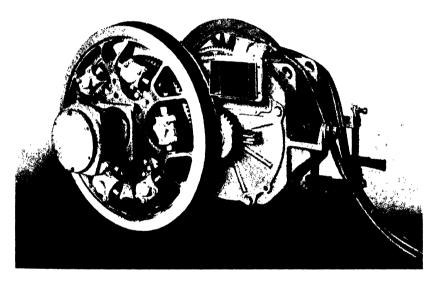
A. Quill and cup drive—frame mounted motor (as fitted to French main-line diesel-electric locos).
